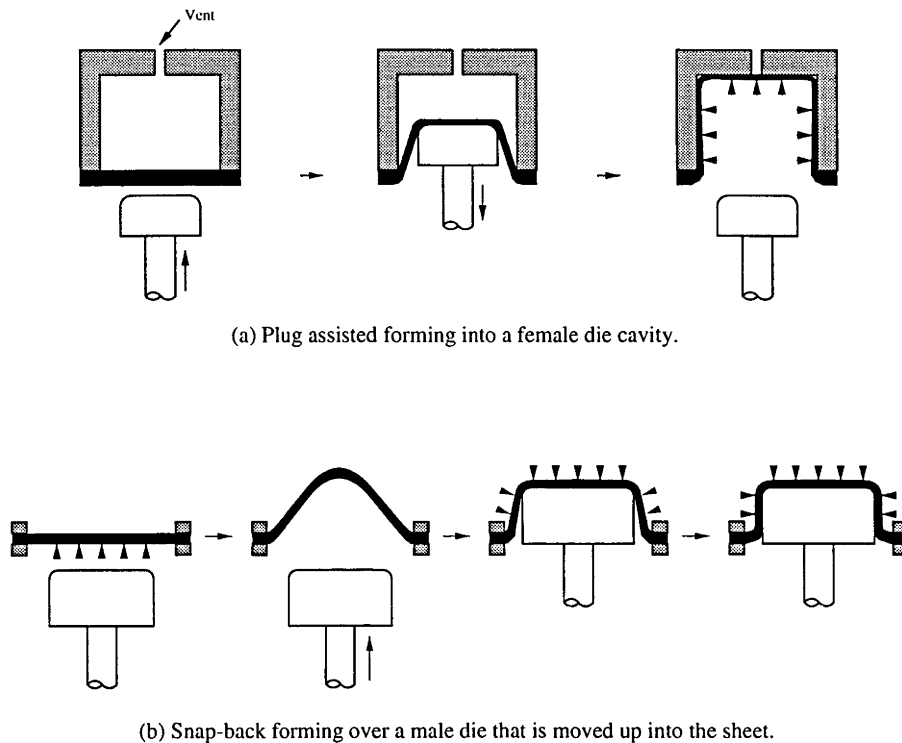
Two processes of thermo-forming method used in superplastic forming [4].
